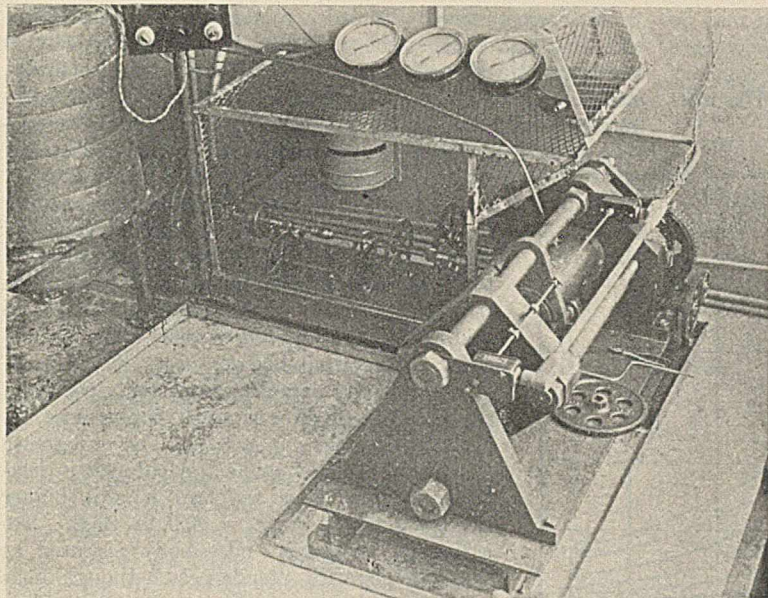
TRANSMISSION AND PRESS IN FINAL ASSEMBLY
